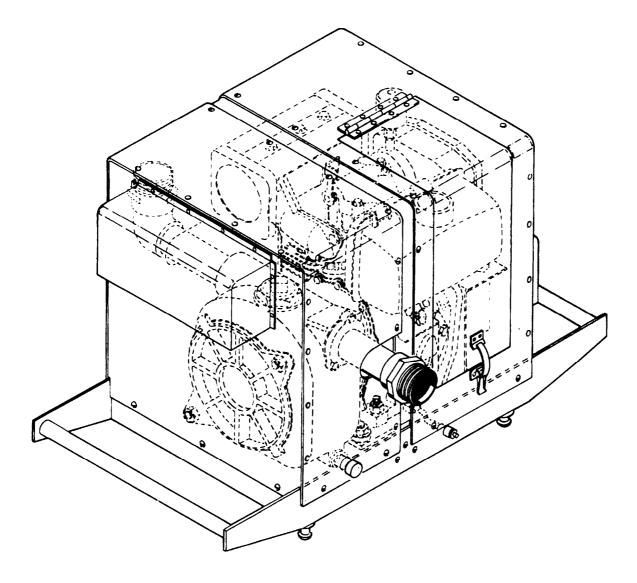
Diesel-Driven Centrifugal Pump Assembly
